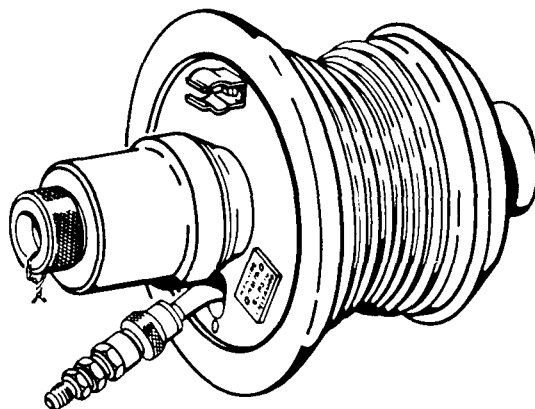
PWA™ 15430 Thrust Chamber Throat Desiccant Plug
